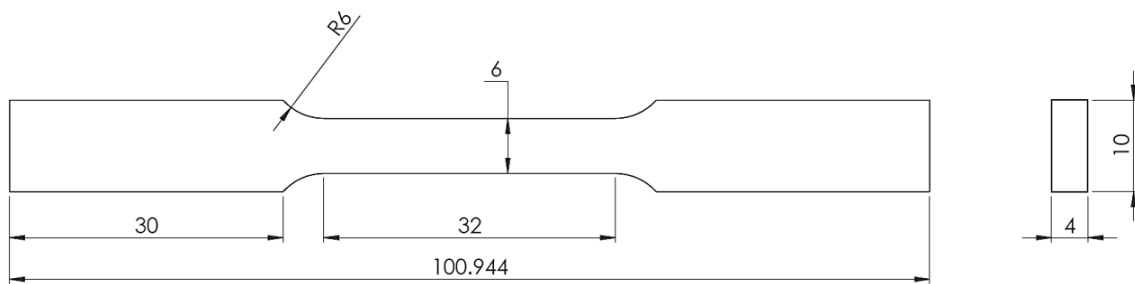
Dimensions of sub-size tensile coupon in millimetres.
